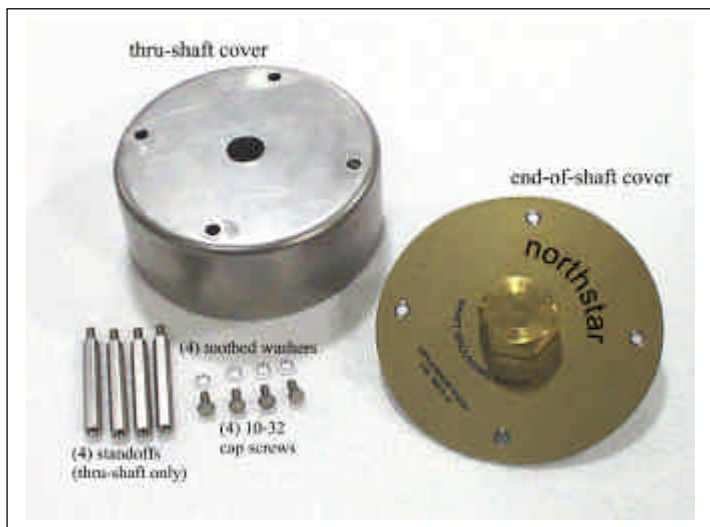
End-of-Shaft Cover & Thru-Shaft Cover
